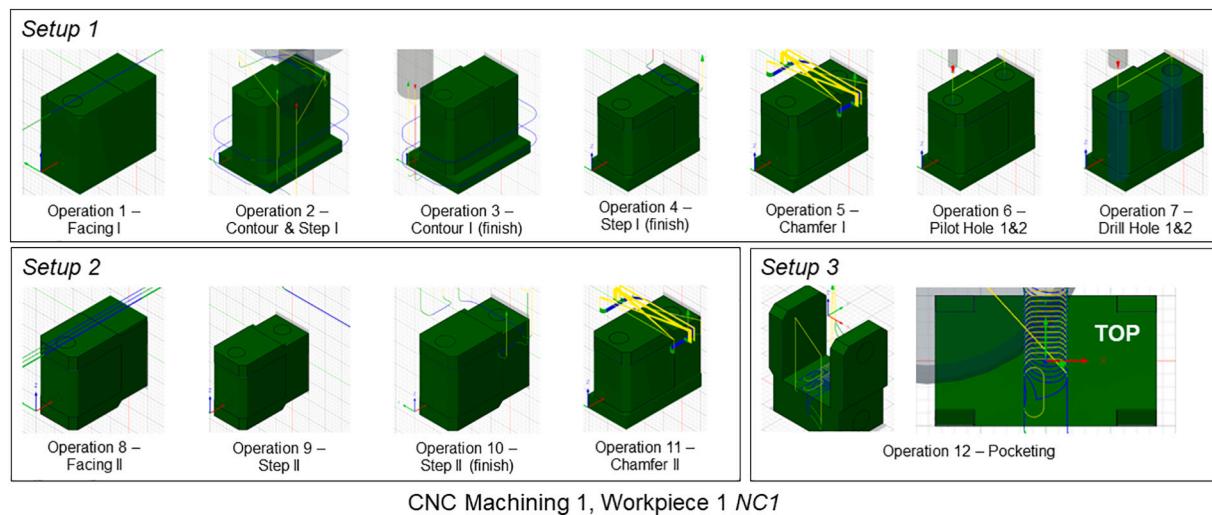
CNC machining strategy employed by Participant 1 to manufacture part NC1.
